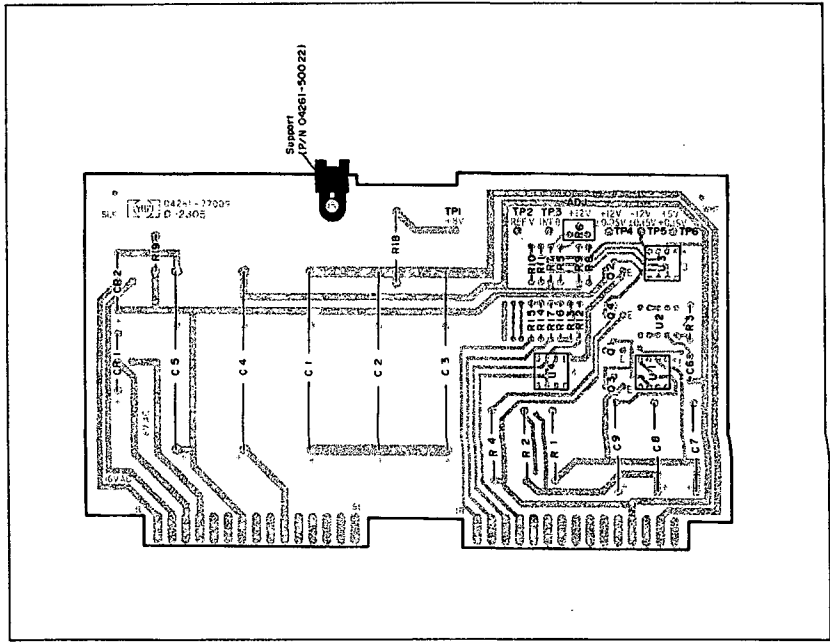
A9 Power Supply Board Assembly Component Locations.
